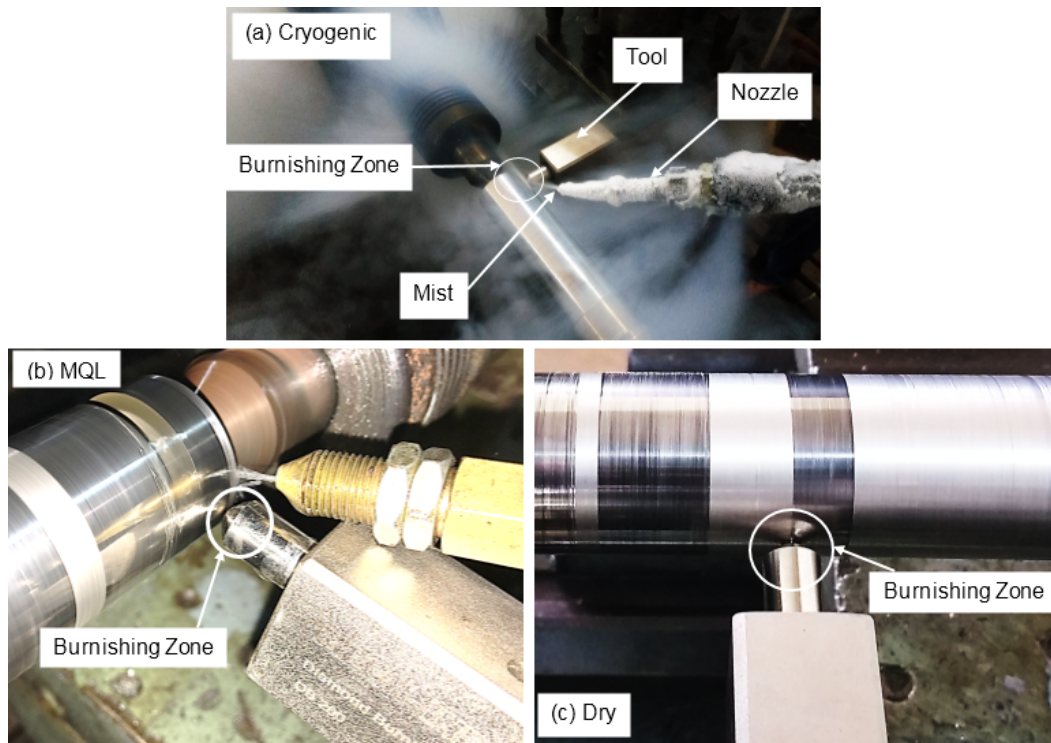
Burnishing zone at (a) cryogenic environment, (b) MQL condition and (c) dry diamond burnishing.
